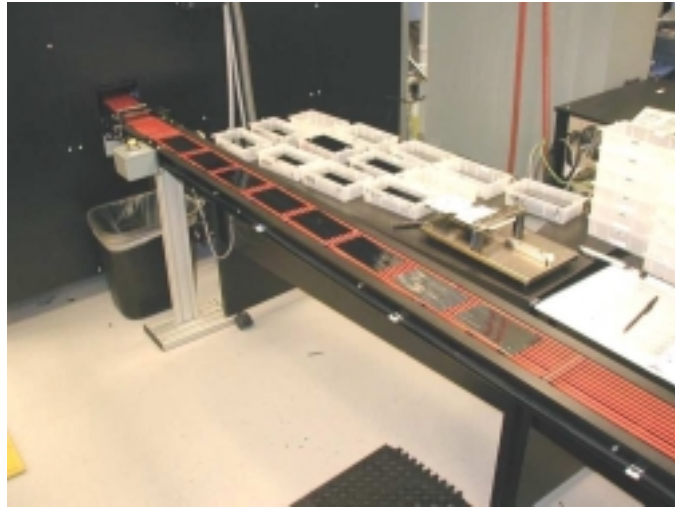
Laser Cut Blanks Emerging from the Laser Cutter.
